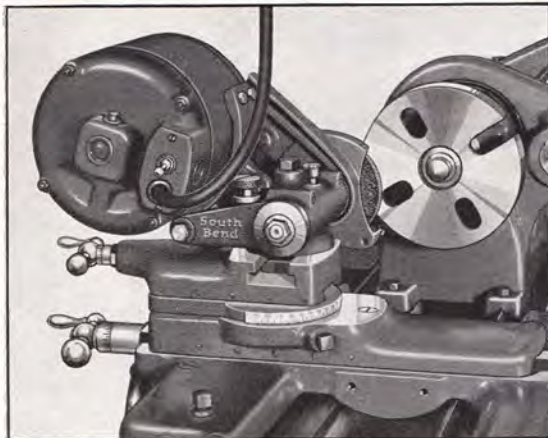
Electric Grinder Mounted on Compound Rest of 9-inch "Workshop" Lathe.
